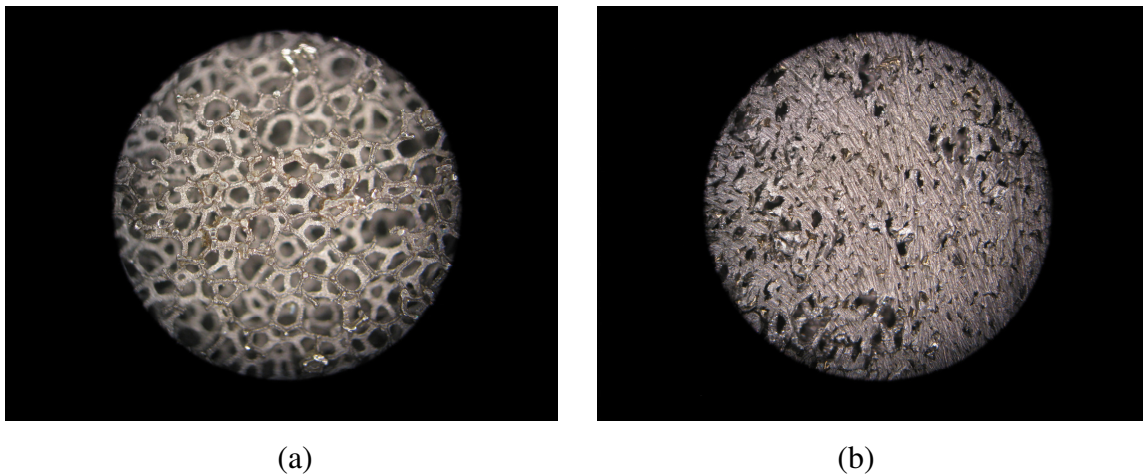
Trabecular Metal™ (a) before and (b) after machining (magnification 40x)
